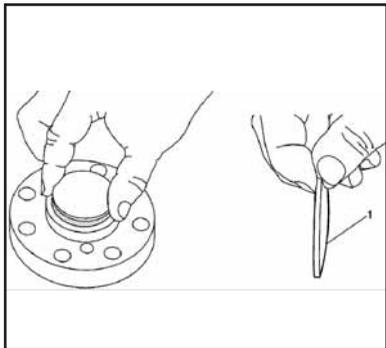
Install service cup plug dish side out on GM 4.2L crankshafts. Do not drive plug in place with impact socket and hammer as damage may result.
